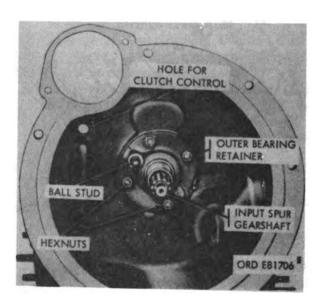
Loosening or tightening input spur gearshaft and outer bearing retainer and retaining nuts—exploded view.
